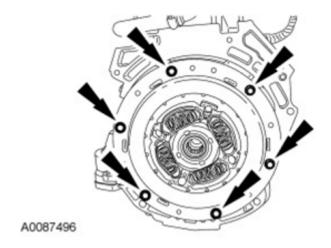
Locating Transaxle Damper Bolts Courtesy of FORD MOTOR CO.
